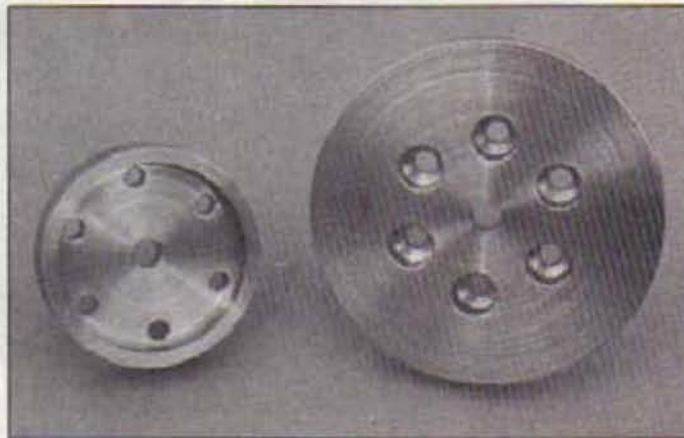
The drilling jig and a loose jaw piece ready for boring and then slotting.
